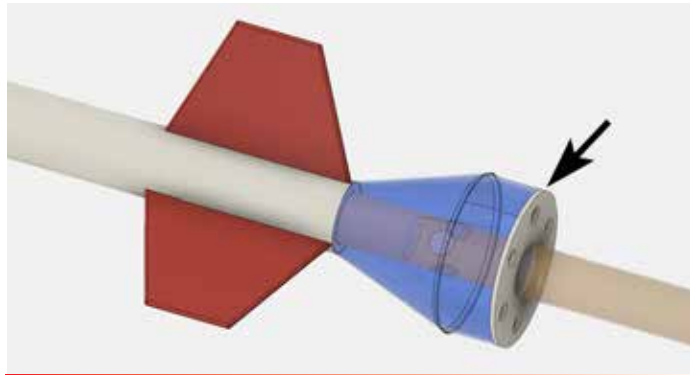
The position of the forward centering ring on the engine mount tube should butt right up against the shoulder of the transition piece.
